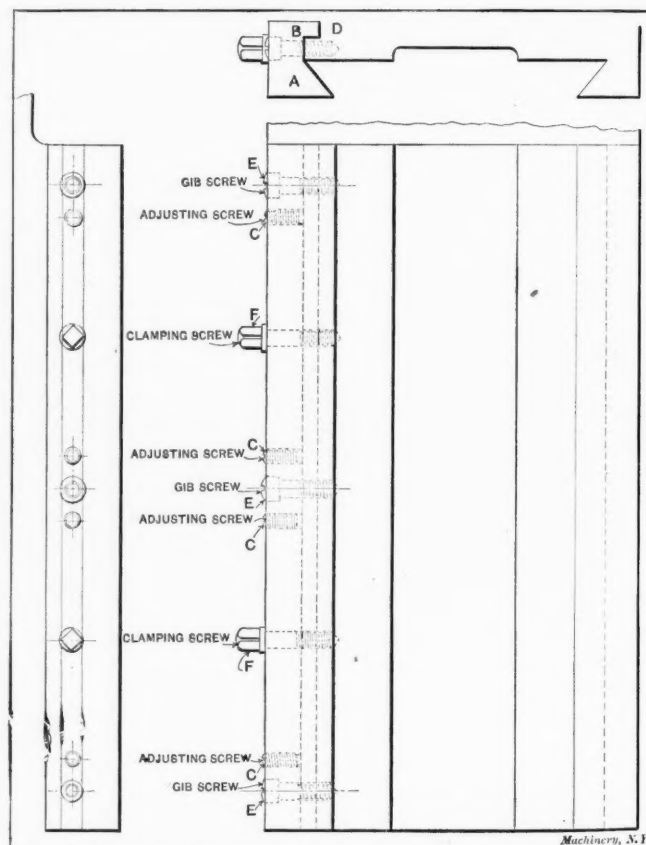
Construction of Gib for Milling Machine Knee Slide
